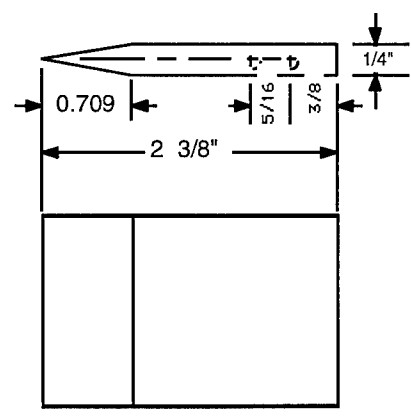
AFIT Shock Tunnel Test Section Fin (dimensions in inches)
